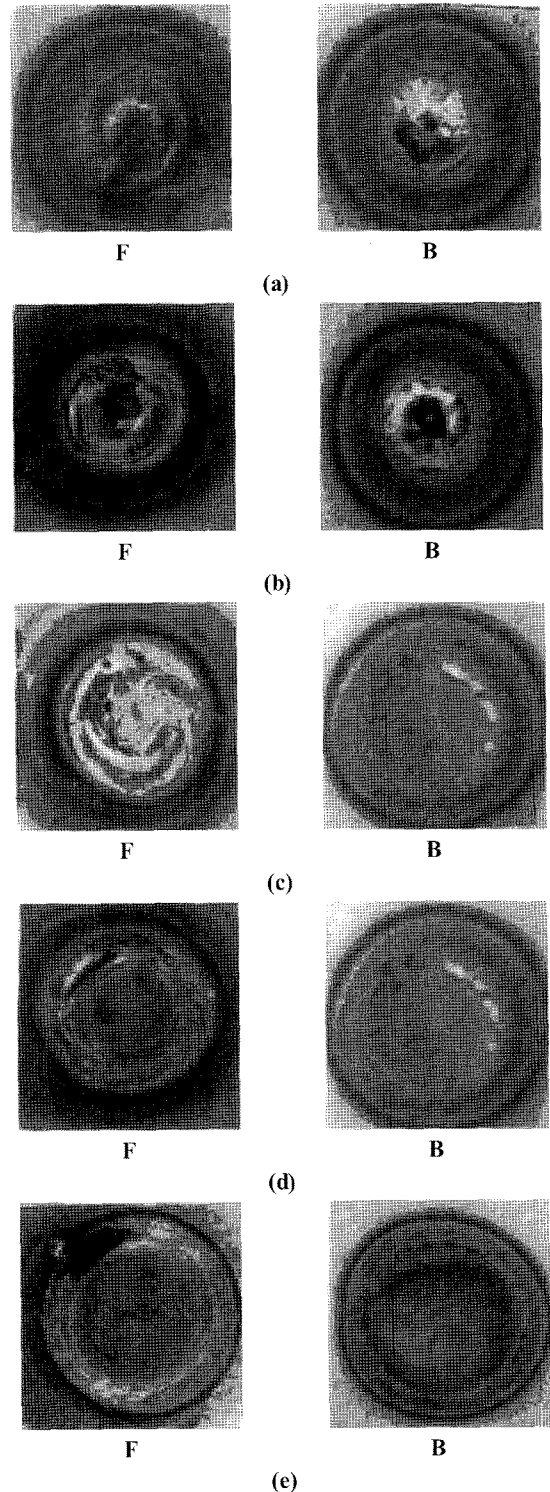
Shape of weld bead(F: front, B: back)
